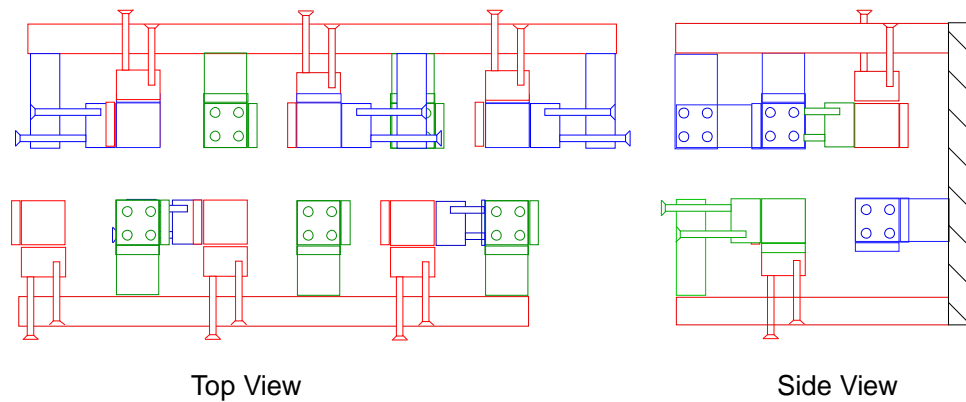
Mechanical drawing of the 16 stage layout used for 2-dimensional scanning. Color coding is used to help identify specific stages.
